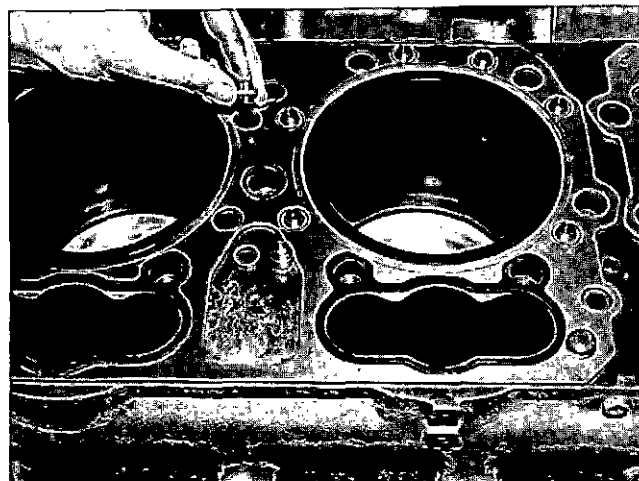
, V414141. Install head gasket grommets and retainers
